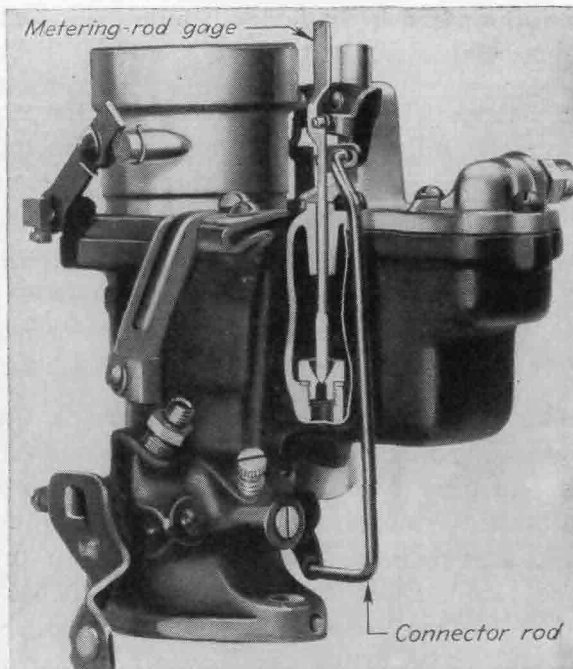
Checking metering rod and throttle relationship with gauge on one type of carburetor. (Chevrolet Motor Division of General Motors Corporation)
